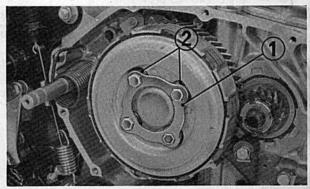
(1) Clutch lifter plate (2) Clutch spring
